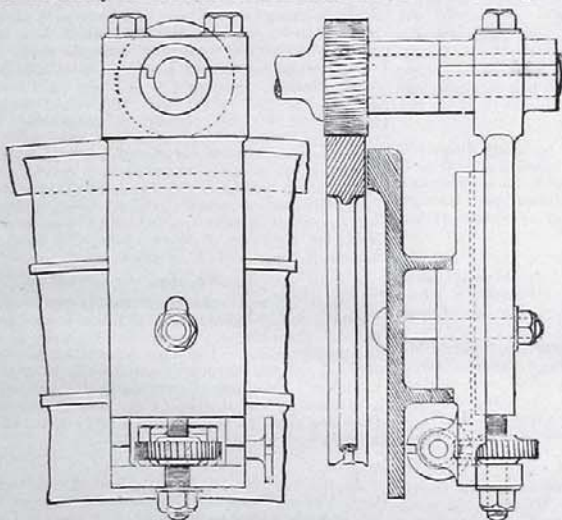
FRONT AND SIDE ELEVATION OF MILLING CUTTER.
